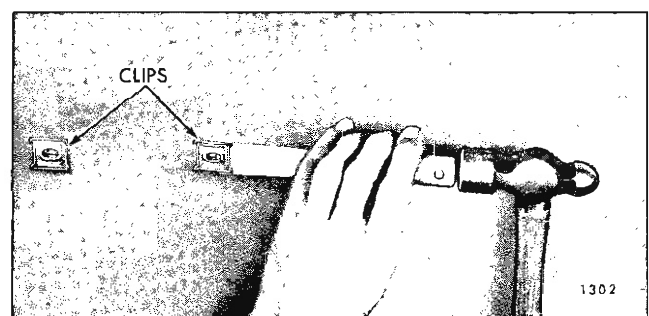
K1—Removal of "Bath-Tub" Molding Clip
